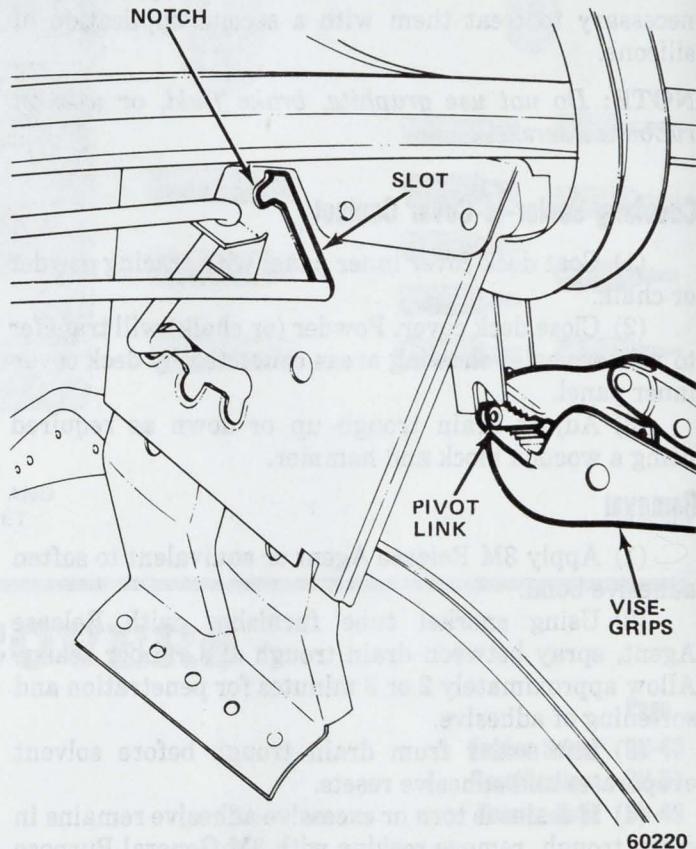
H-45 Torsion Rod Removal—Nonadjustable End
